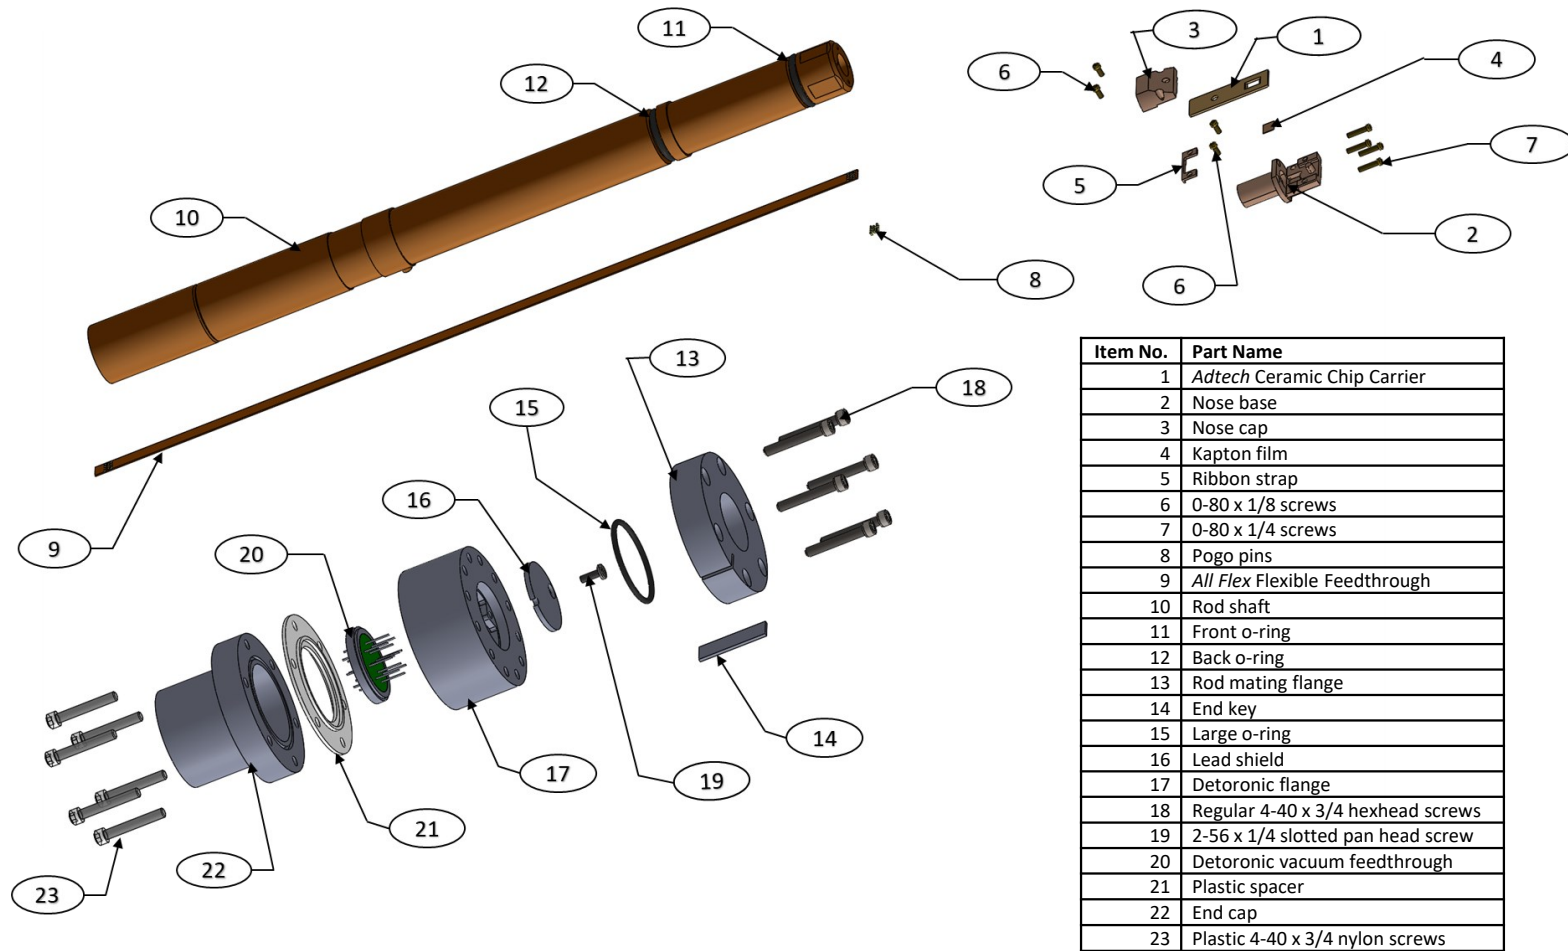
CAD exploded view of the JEOL custom in-situ holder.
